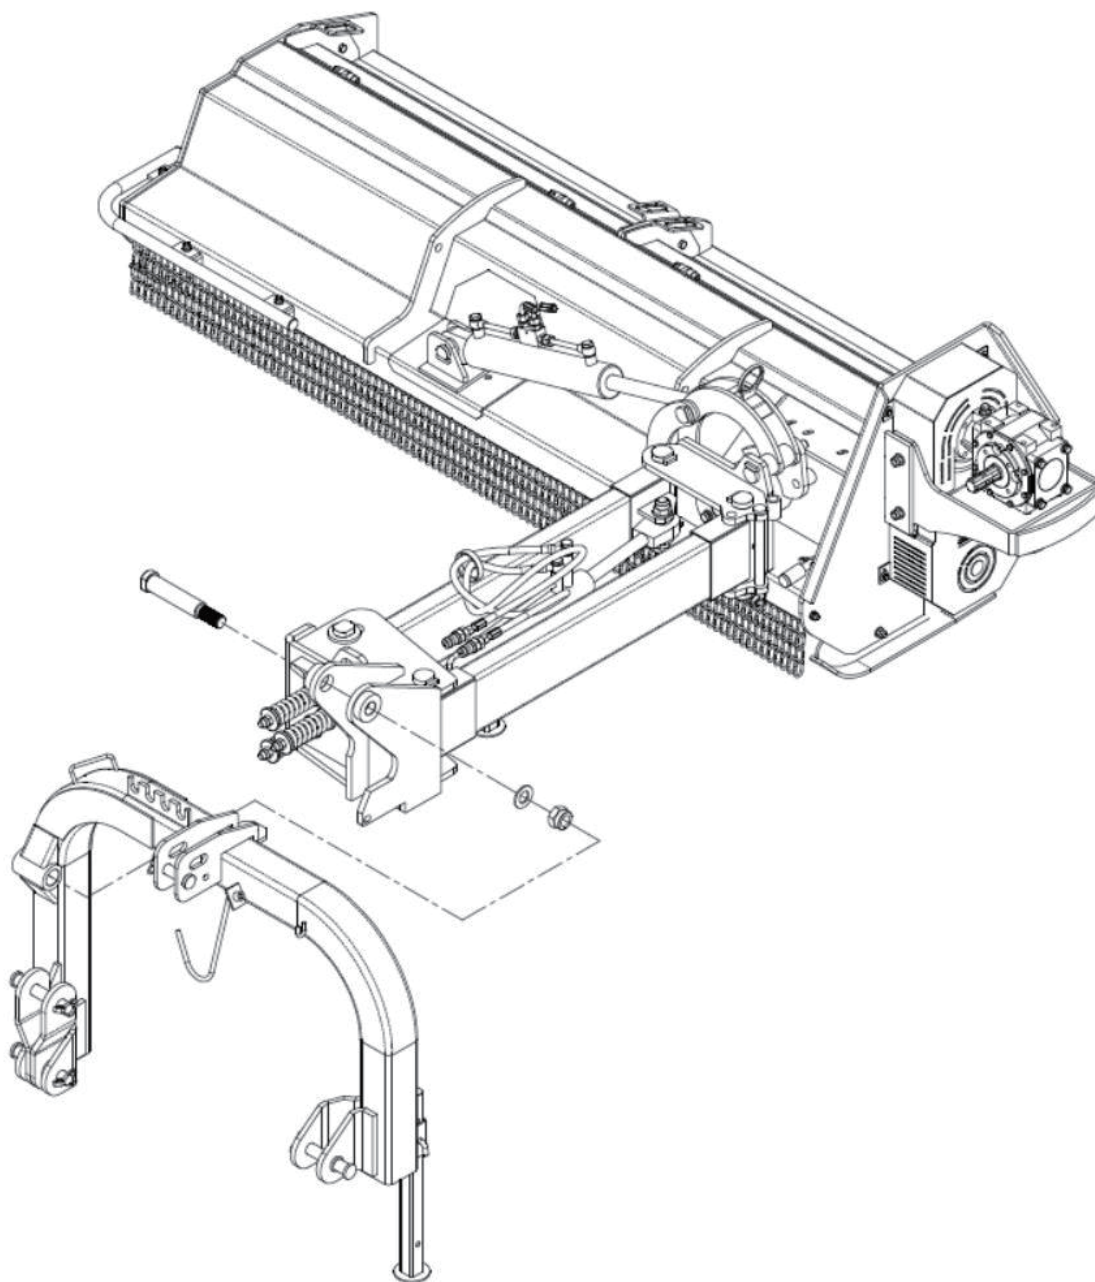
Installing Hitch Tube Weldment and Fittings
